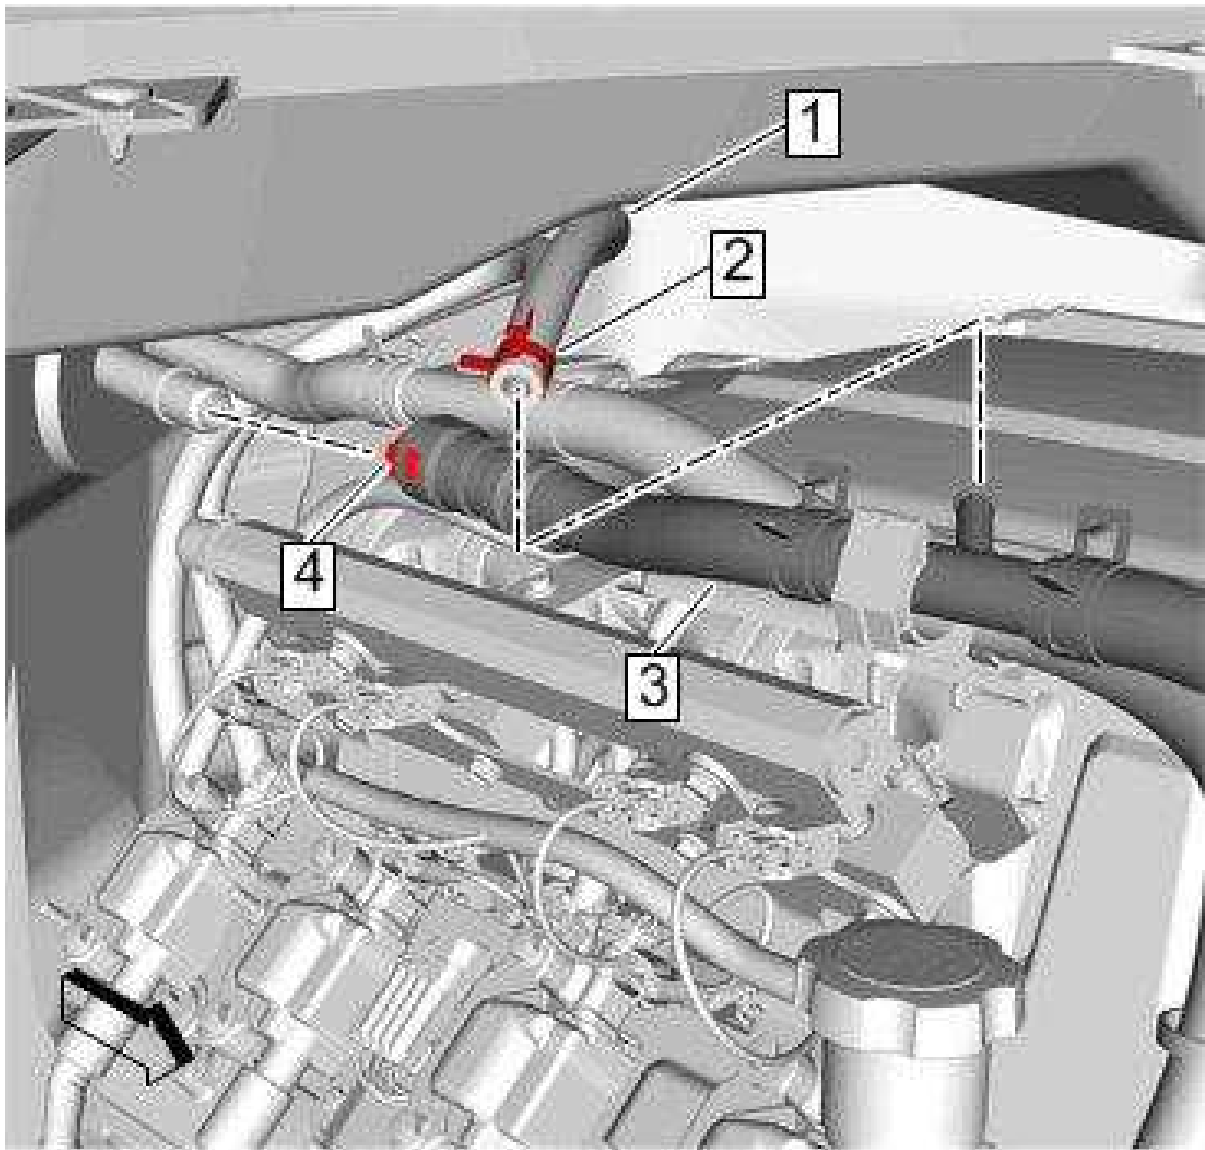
Heater Outlet Hose From The Heater Core Tube
